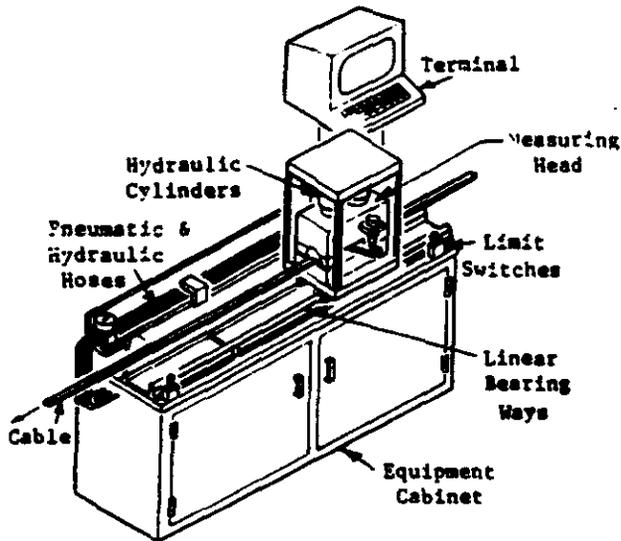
This figure illustrates the measuring machine installed in the cable insulation line.
